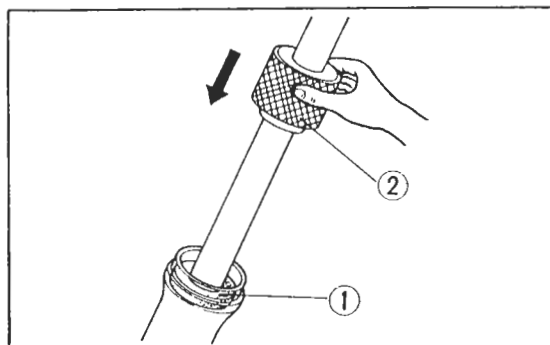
(1) Oil seal (2) Fork seal driver
